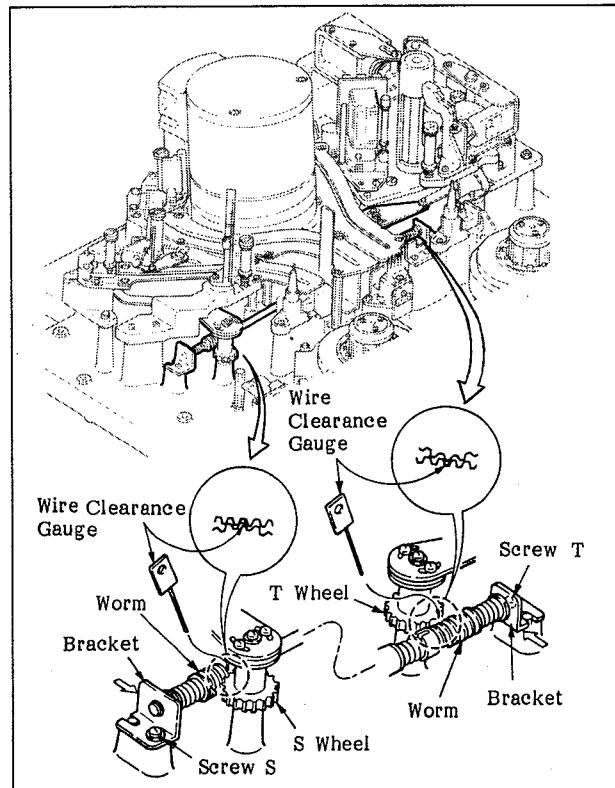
Adjustment of the Clearance between the Link Wheel and the Worm Gear
